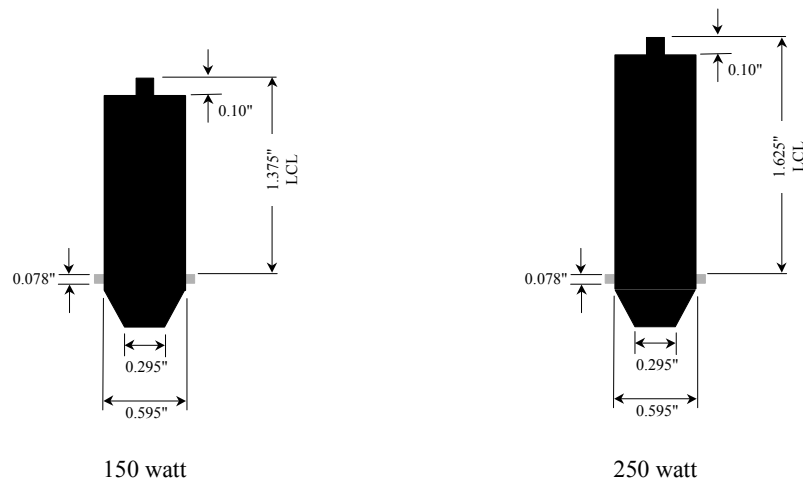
Dimensions of the 120-Volt Focus Fixtures used with the CG-4P.
